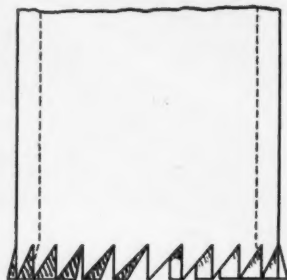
Teeth cut in end of 2-in. pipe and faced with tungsten-carbide tips permit drilling around old foundation bolts without subjecting concrete to shattering impact of hammer and drill method.
